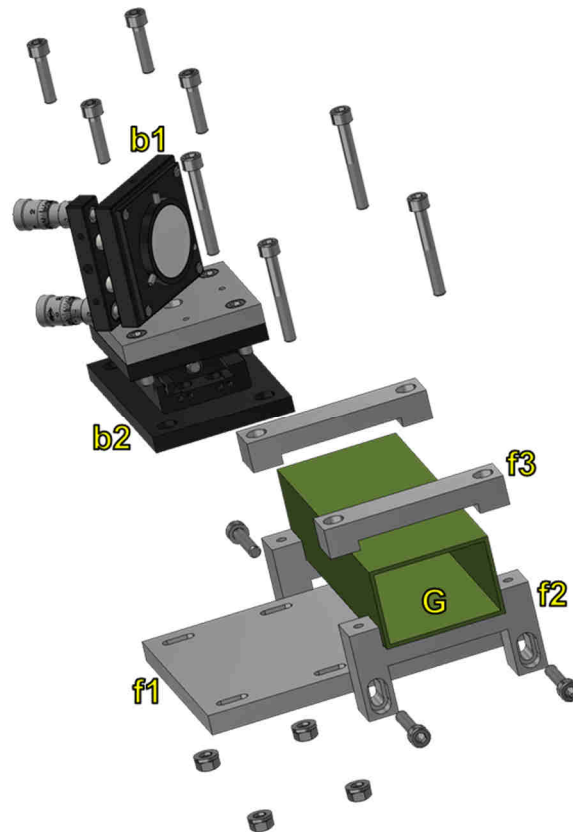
Expanded 3D presentation of the mirror assembly and its mounting stage. G: the cross section of the main frame of the NAC on which the laser reflection system is clamped; b1: OWIS TRANS 60L mirror holder and Ø35 mm mirror; b2: OWIS micro linear motion (module number unknown); f1: base piece of the mounting stage with grooves that enables horizontal movement of the mirror assembly when adjusting; f2: lower part of the clamp with grooves that enables vertical movement of the base piece when adjusting; f3: upper part of the clamp that withstand the weight of the entire assembly. Tightening pieces are of the DIN norm and are therefore not specified. The mirror assembly is not further expanded because it is used as received.
